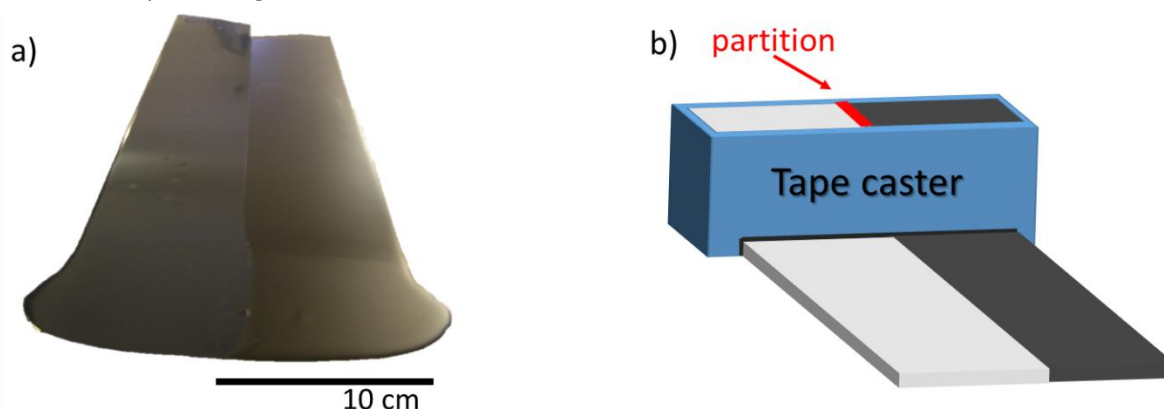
a) Photograph of side-by-side cast tape and b) schematic of casting tank employed for adjacent co-casting. The casting head is divided by a Teflon partition into two chambers to produce a tape with two compositions.
